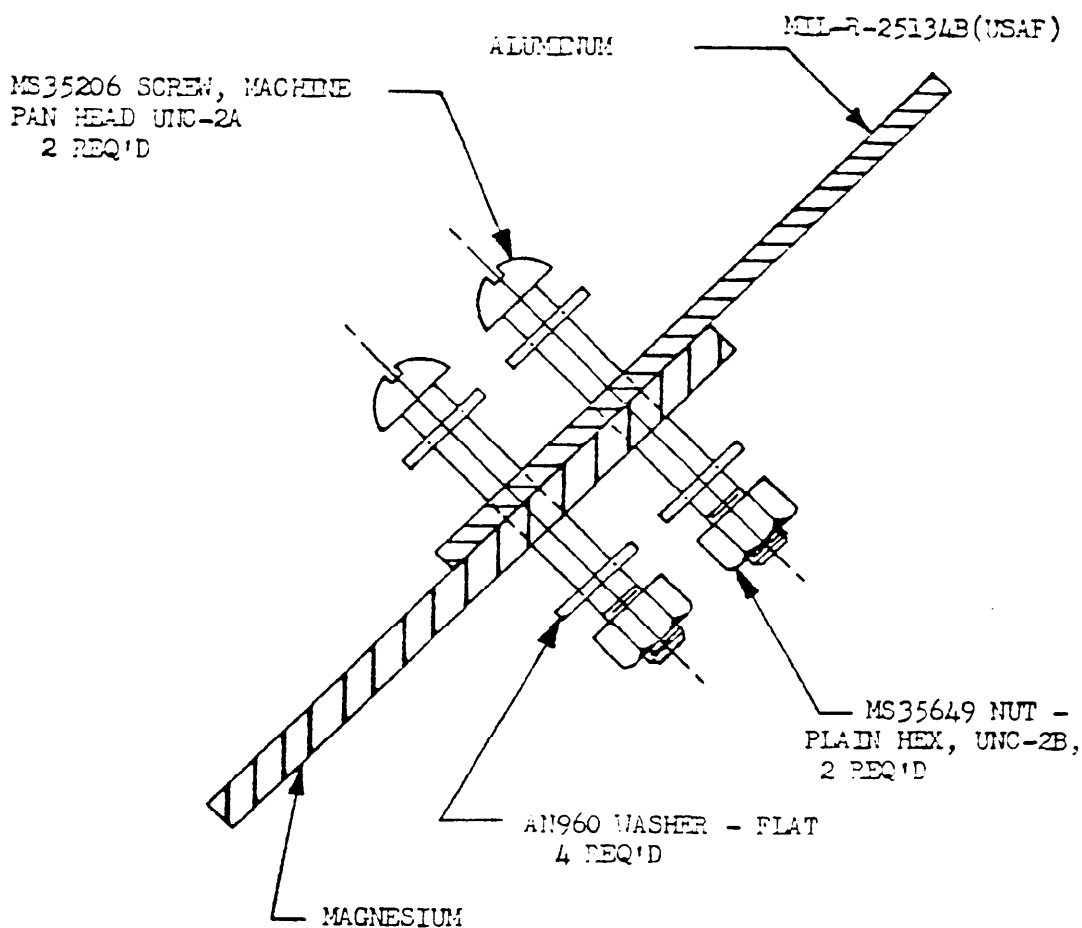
COUPLING OF DISSIMILAR METAL TEST PANELS
